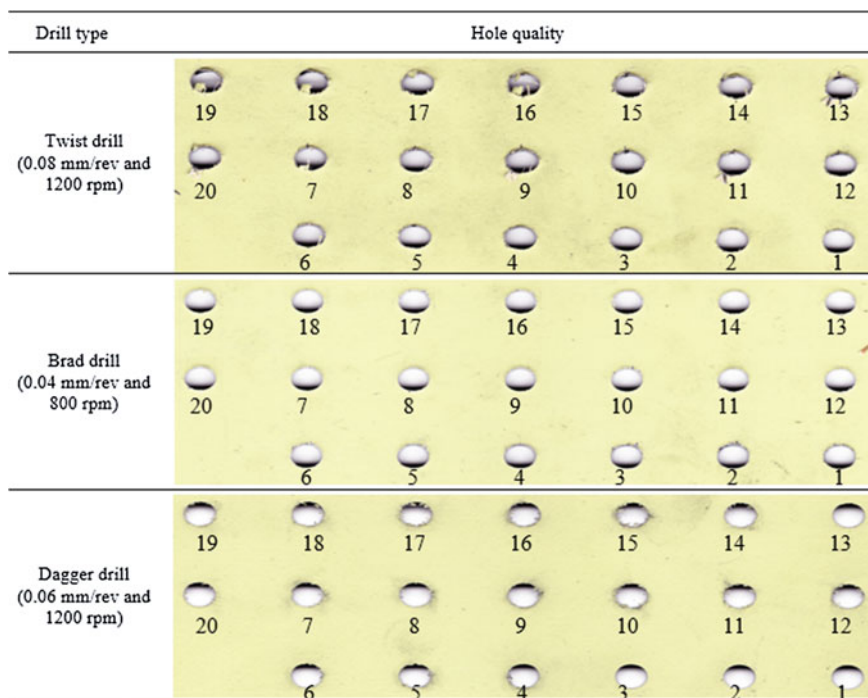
Hole quality of the 20th drilled holes using the twist, brad and dagger drills
